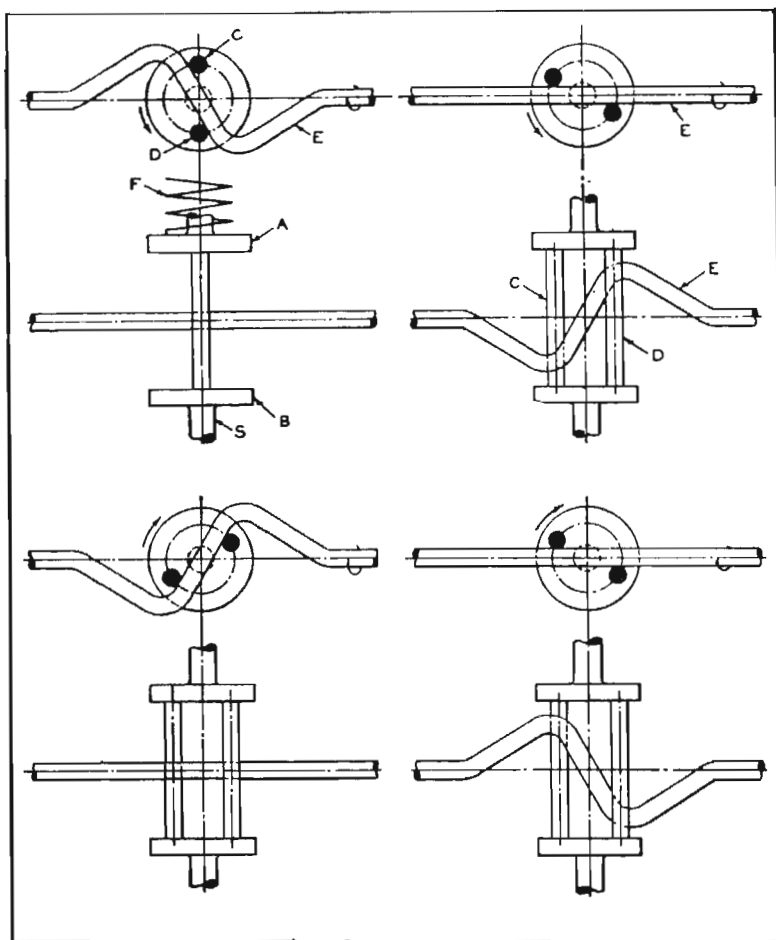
Four Views of Simple Oscillating Mechanism, Showing How Rotating Shaft *E* Transmits Oscillating Motion to Shaft *S*.
